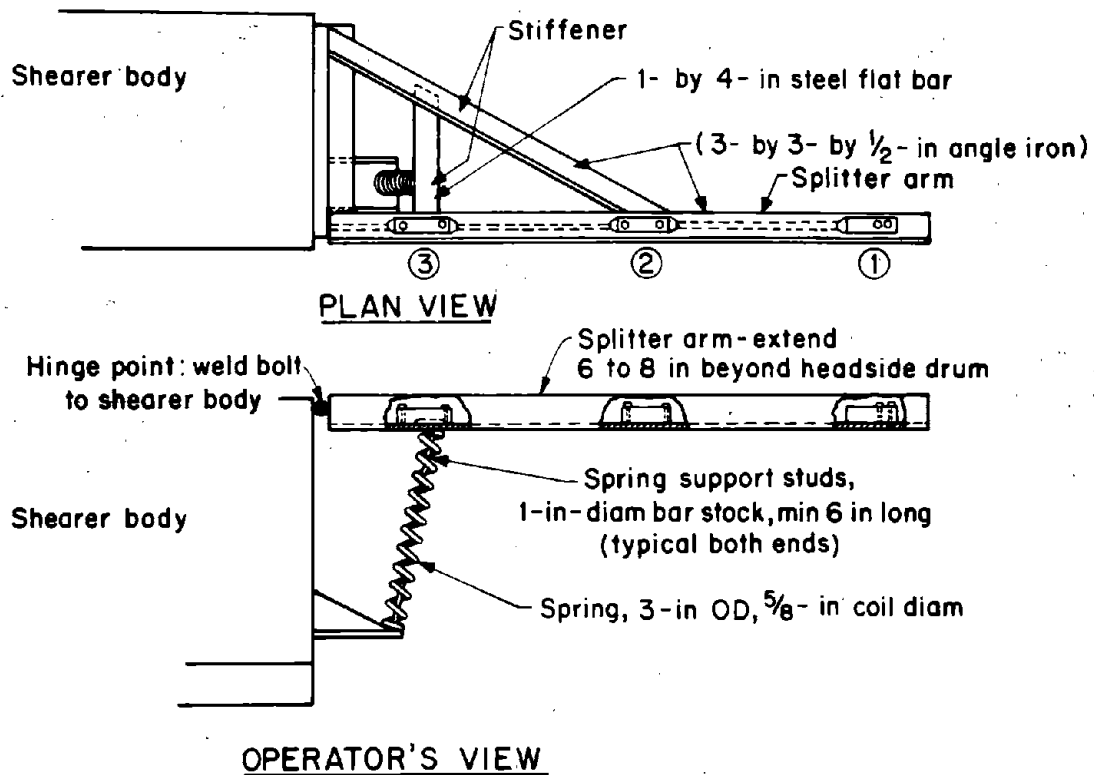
Design for headside splitter arm. All dimensions are in inches.
